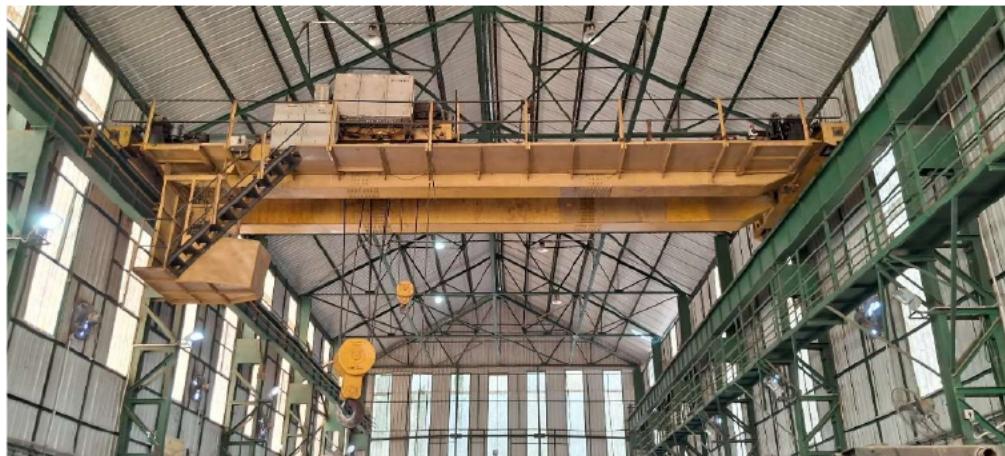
Fig. EOT Crane in Heavy Equipment Repair Shop of Asset Workshop
